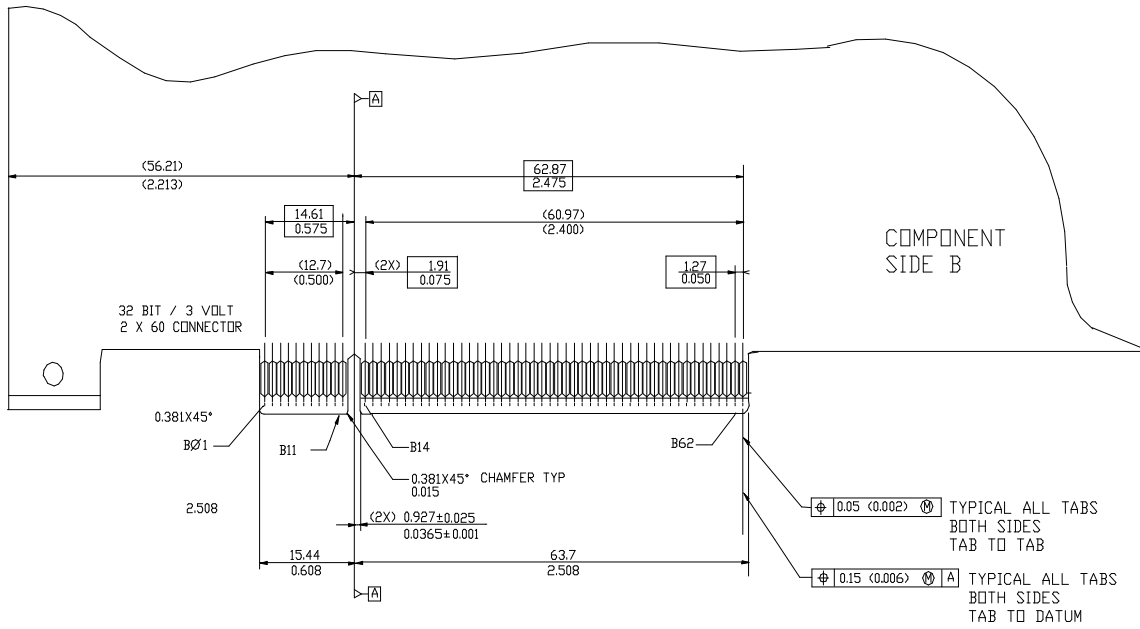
3.3V/32-bit Card Edge Connector Dimensions and Tolerances
